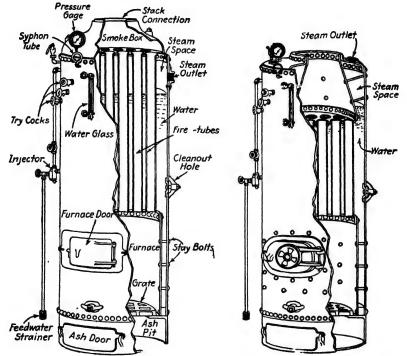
Murray vertical fire-tube boiler, with exposed tube sheet.
